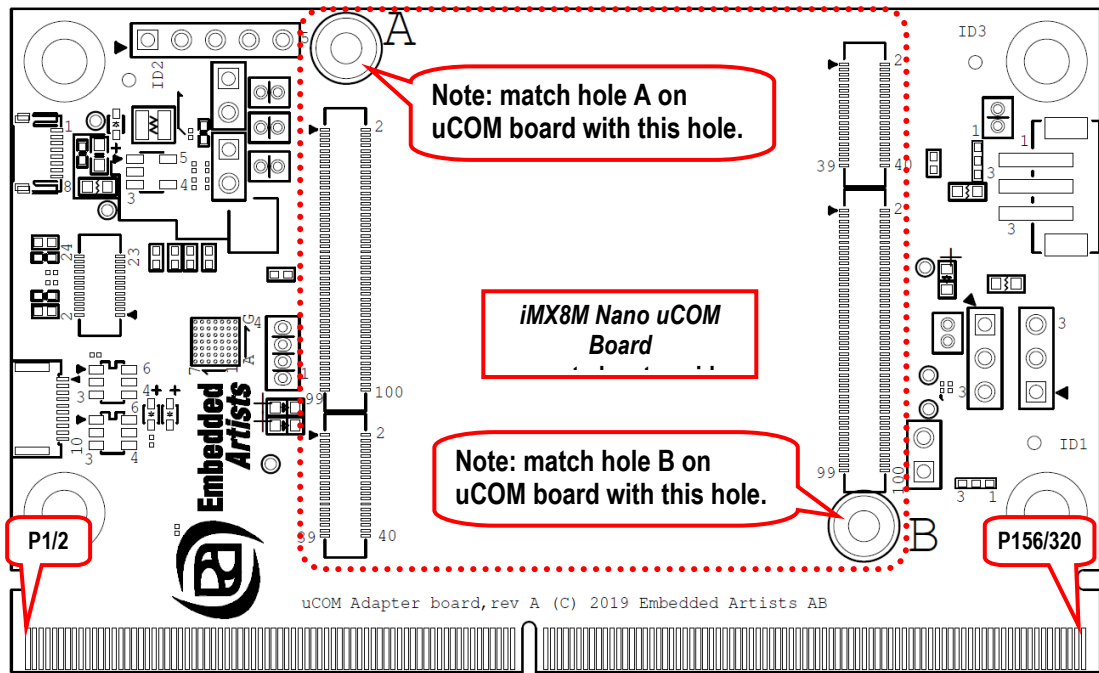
uCOM Adapter Board Pin Numbering, Top Side
